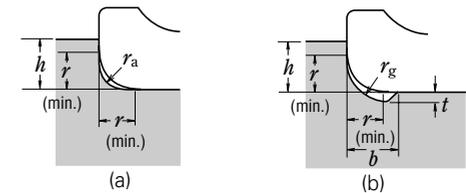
Chamfer Dimensions, Fillet Radius, and Shoulder Height
